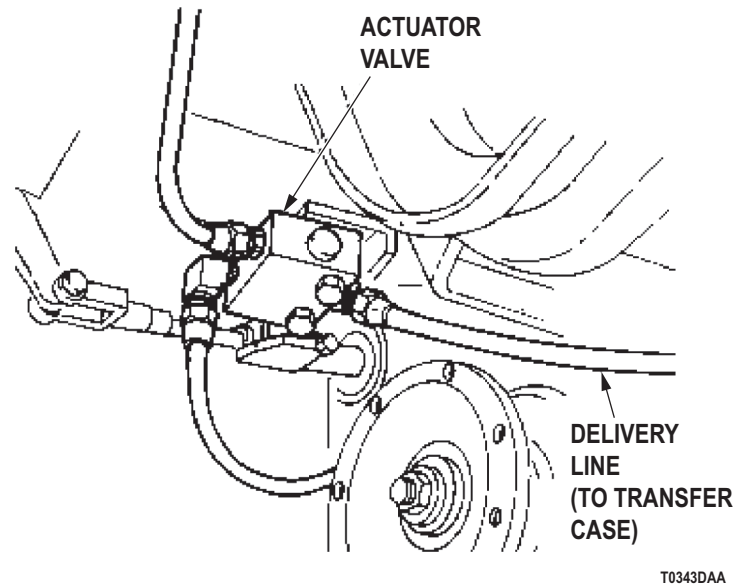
Air Line Between Actuator Valve and Transfer Case.
